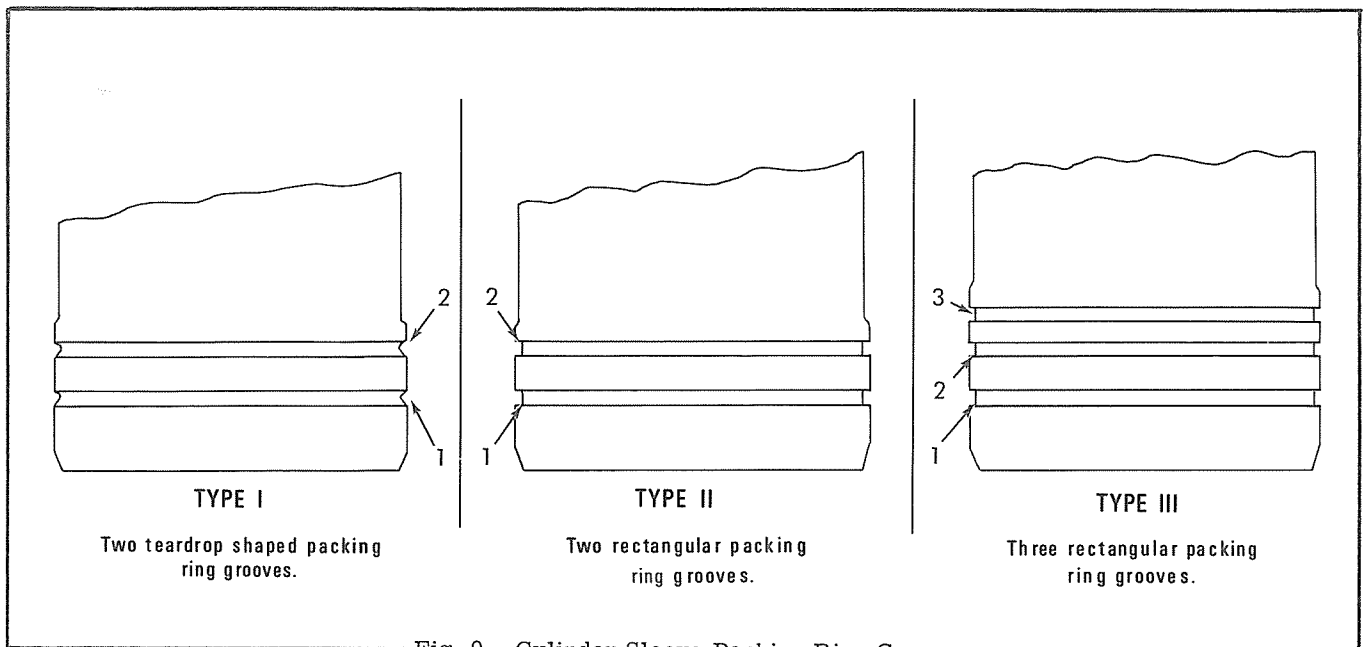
Cylinder Sleeve Packing Ring Grooves
